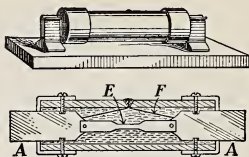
A cartridge fuse. The complete fuse inserted in the circuit is shown above; a longitudinal section below. A, A, contact strips of copper; E, fuse wire; F, a wire which chars the casing when the fuse melts.
